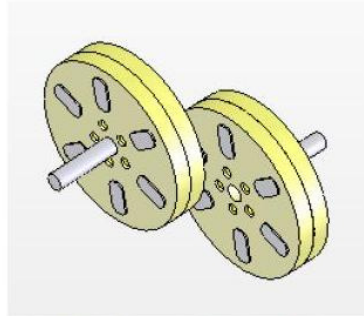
Axial Flux Magnetic Gear. This figure shows a CAD model of an axial flux magnetic gear.
